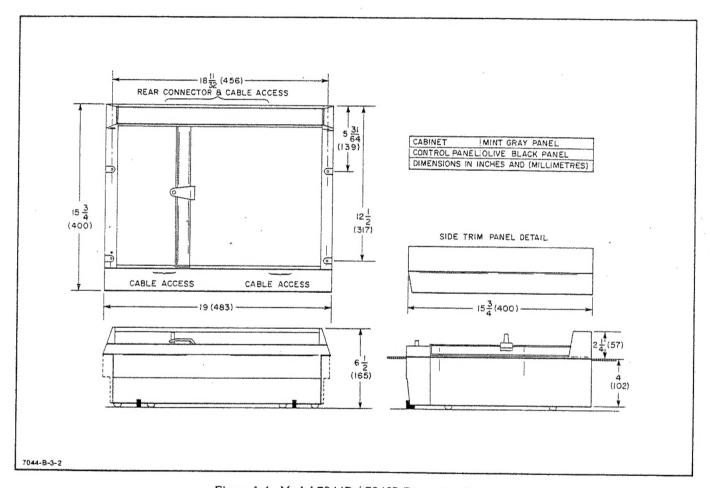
Model 7044B / 7045B Dimension Drawing
